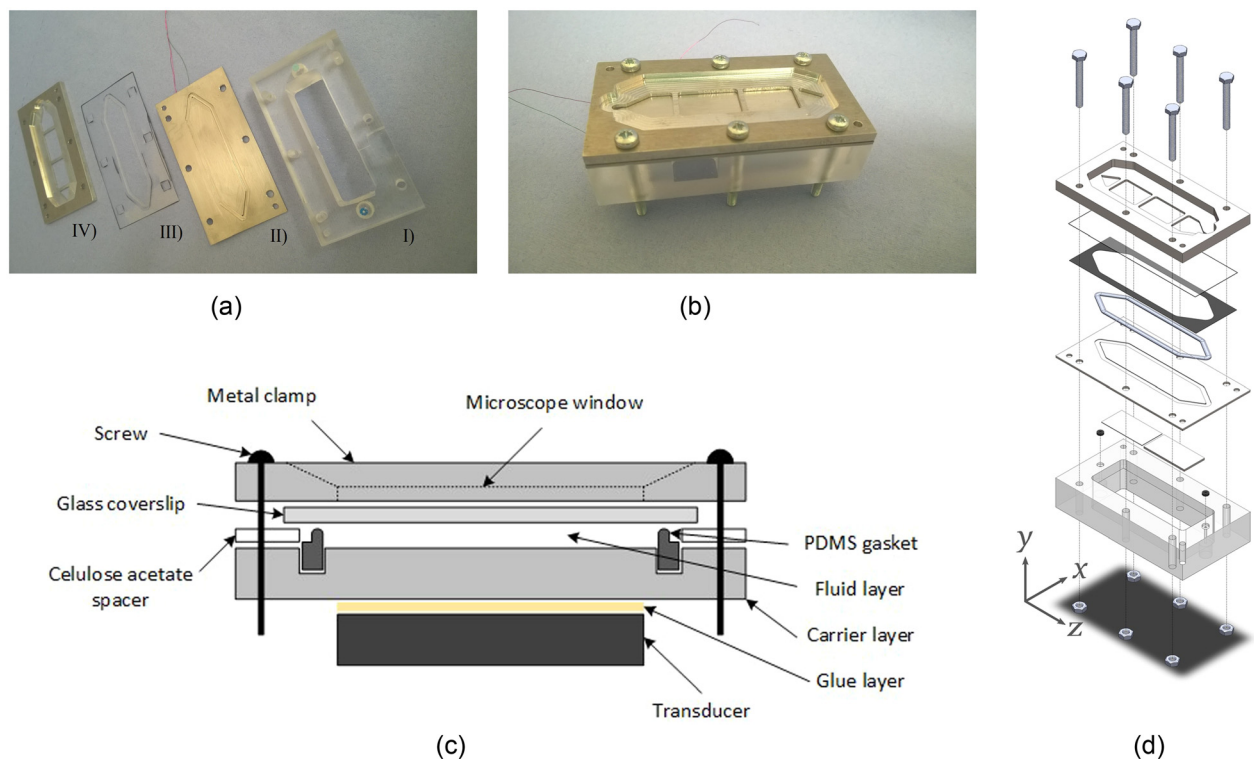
(Color online) The images and schematics of the device design (a) disassembled, (b) assembled, (c) cross section schematic, and (d) exploded schematic. In the disassembled image, the labeled parts are (I) manifold, (II) metal carrier layer with transducer glued underneath, (III) cellulose acetate spacer, and (IV) metal clamp.
